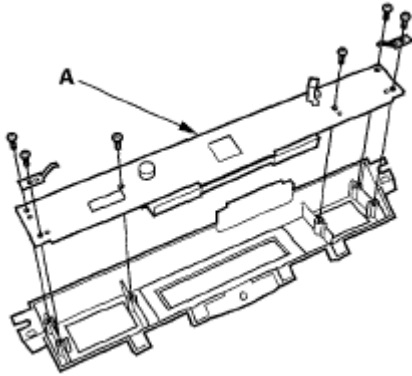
Identifying Rear Indicator Sub Printed Circuit Board
